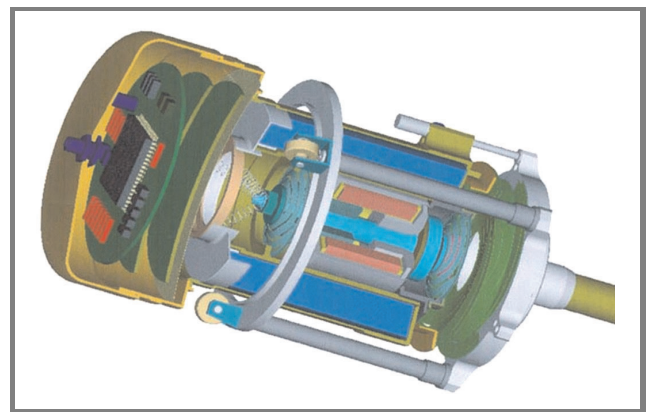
Cross-section of the hammering device. Only the upper part of the penetrator rod is shown.
